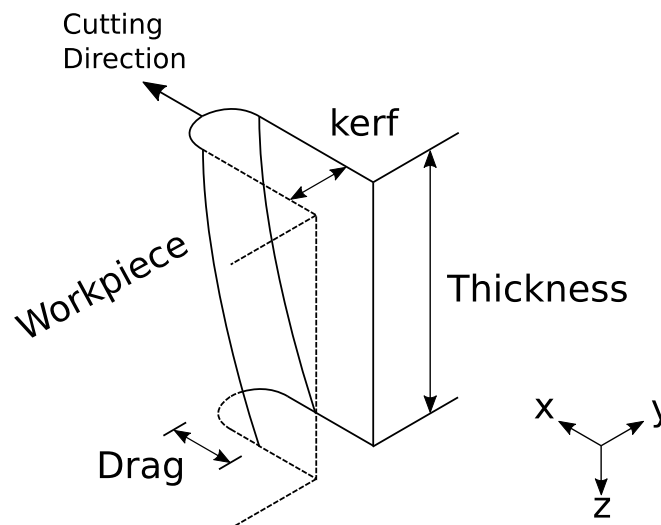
Schematic view of the workpiece after the oxy-fuel cutting process.
